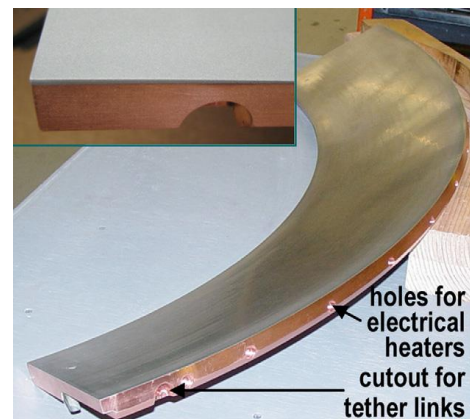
Copper plate with brazed stainless steel skin for LLD
